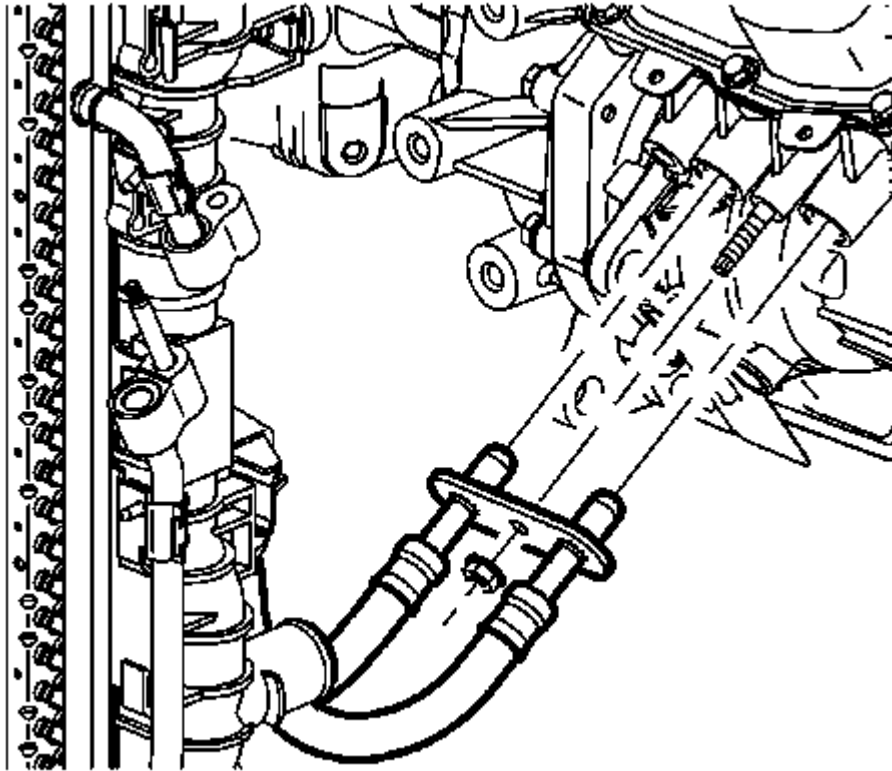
View Of Transaxle Oil Cooler Line Assembly
